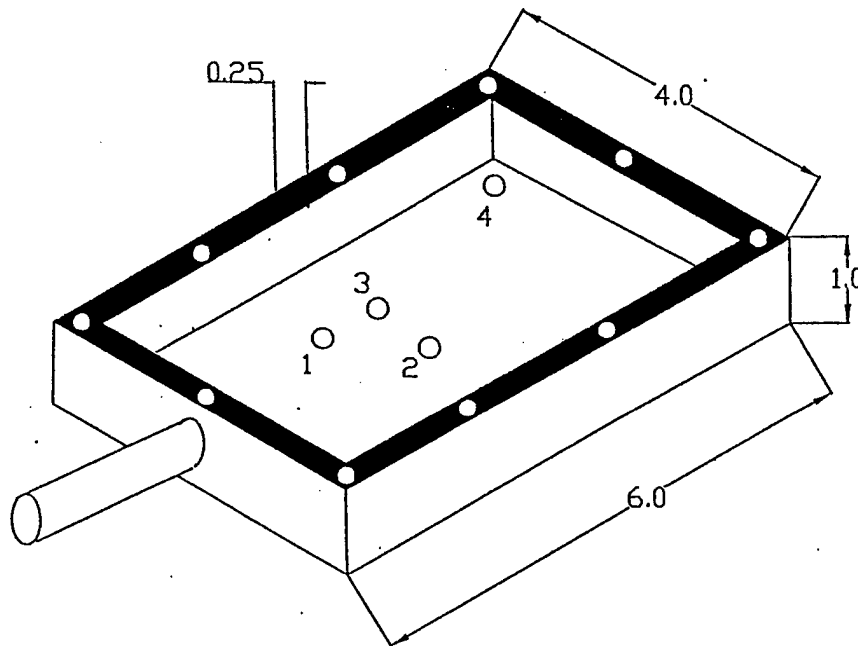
304 Stainless Steel Probe Showing Four Thermocouple Positions: All dimensions are in inches
